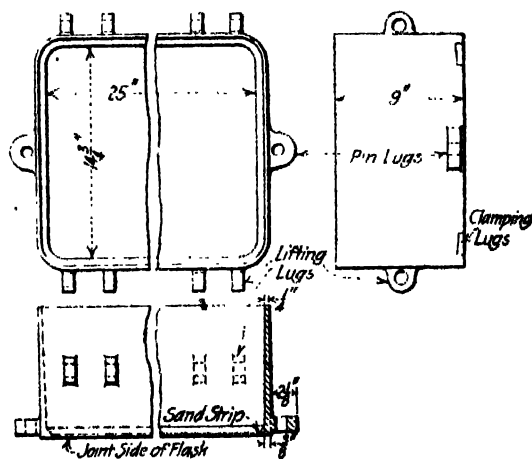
Standard 16 x 24-In Molding Flask for a Jolt Roll-Over Molding Machine
